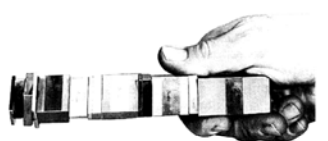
These blocks show how tenaciously finely finished surfaces will adhere to each other. (Courtesy of DoAll Company)
